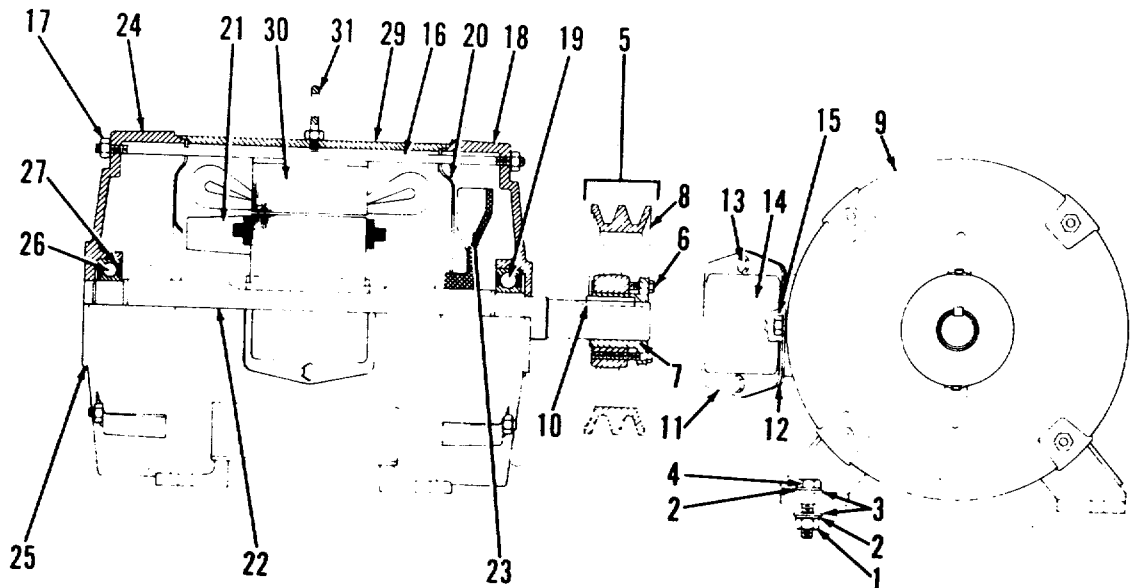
Electric Motor Assembly (Model HR10-8M-1)
